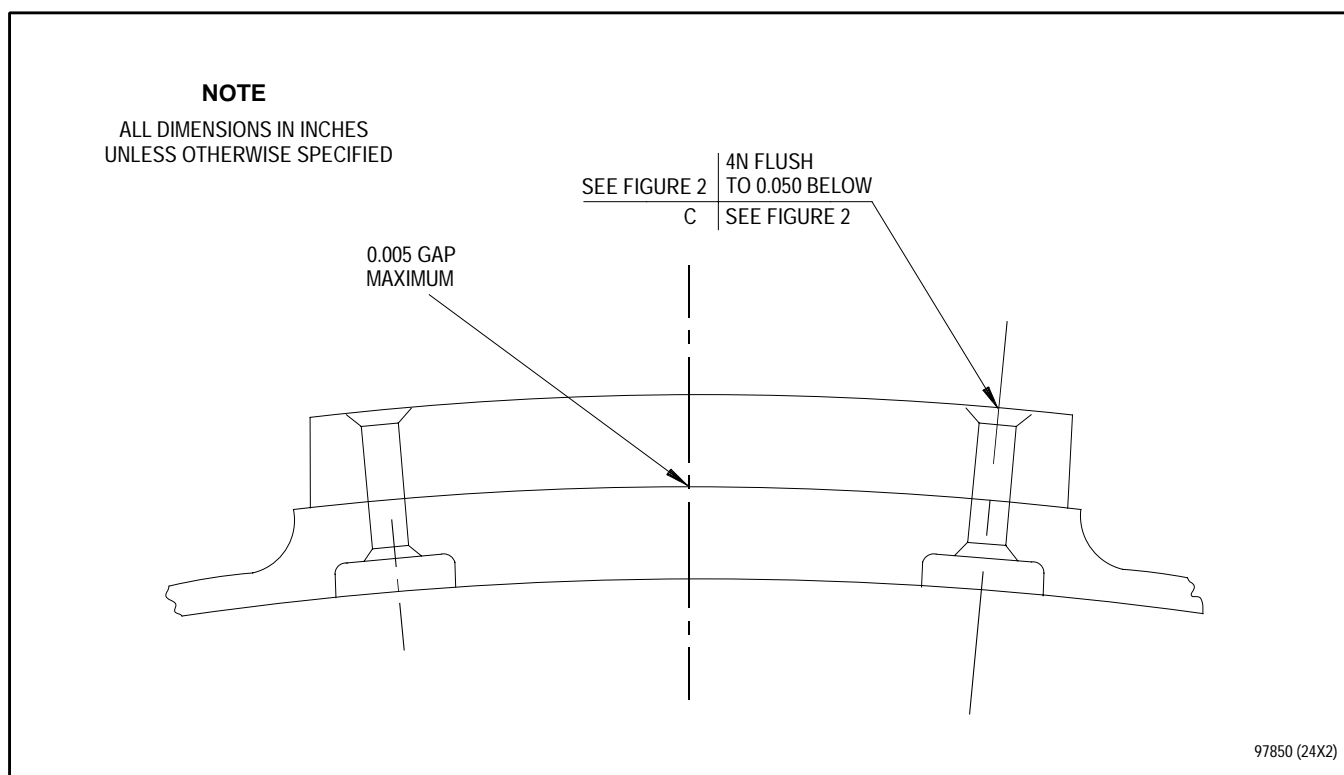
Fourth Through Ninth Stage Compressor Case Set - Bumper Replacement
